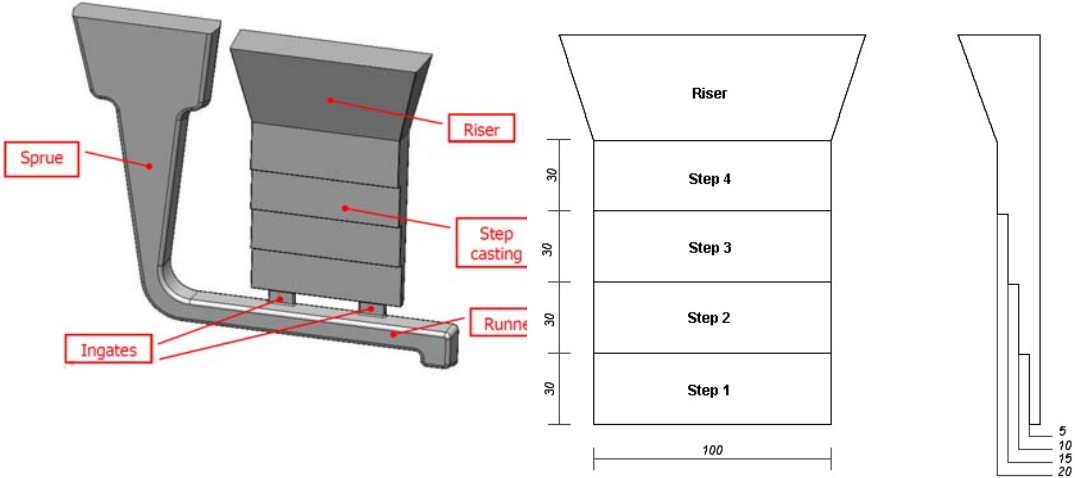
(a) The step casting CAD geometry with (b) front and side views. All the measures are in mm.
